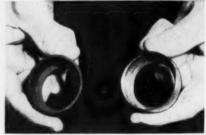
Illustration showing actual grease retaining rings which were machined on the new J & L boring machine shown in Fig. 1.
